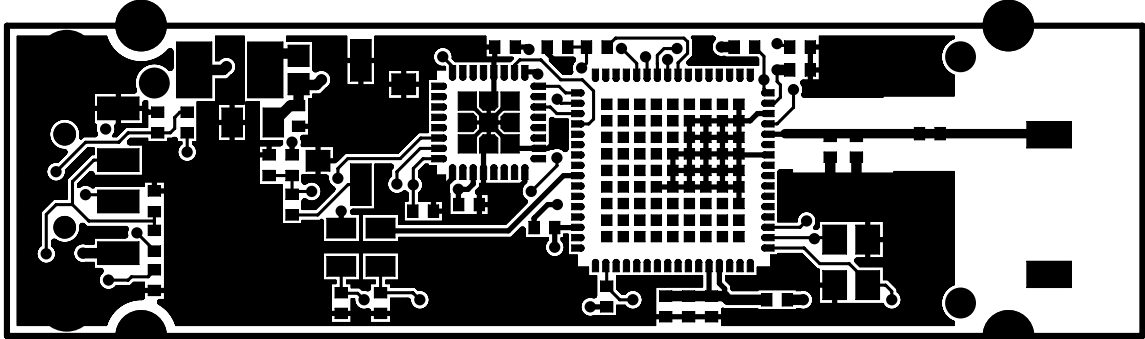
1322x USB Dongle PCB Layout (Top View)
